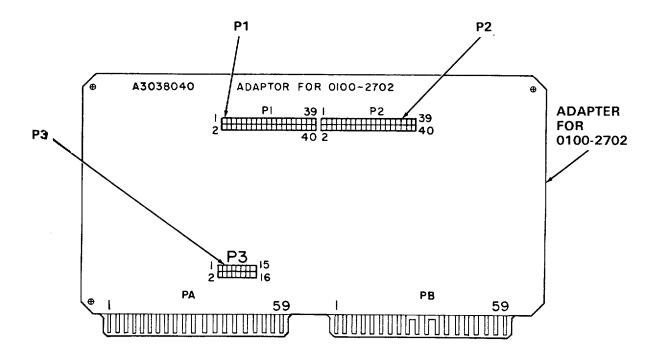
Cable Connection Points and Components Used During Display Board Test (Sheet 1 of 2)
